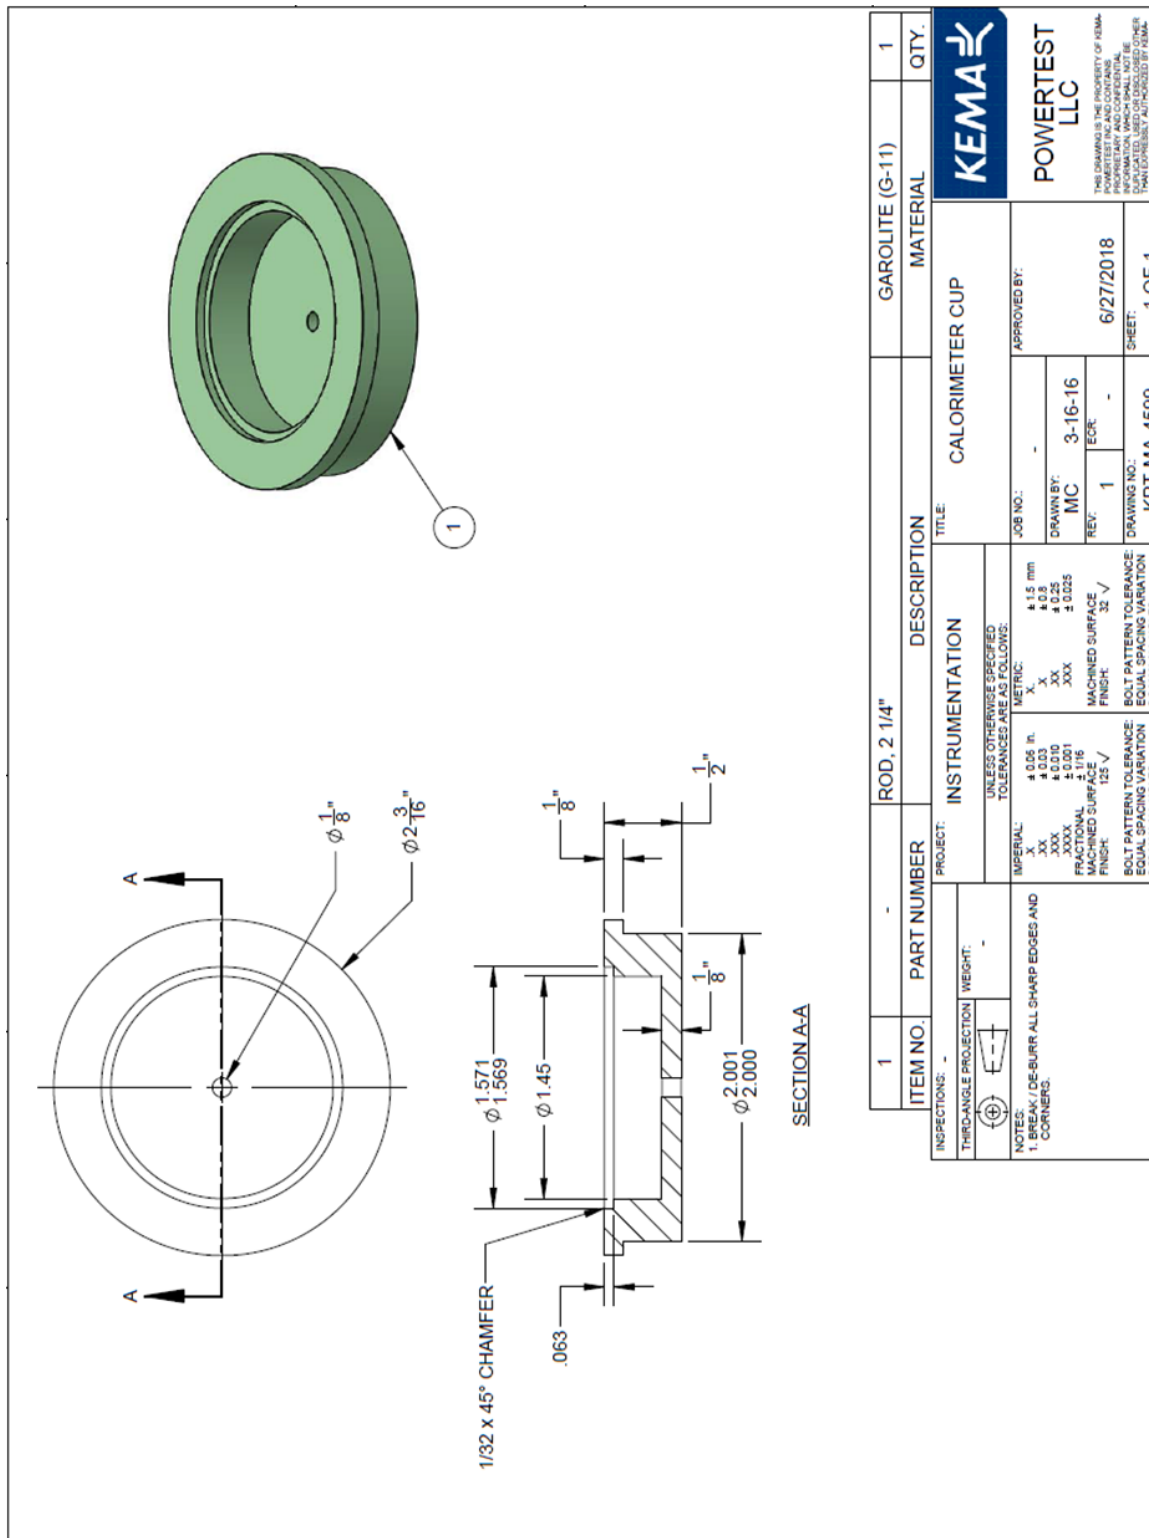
Drawing KPT-MA-4599, ASTM Calorimeter Cup.
